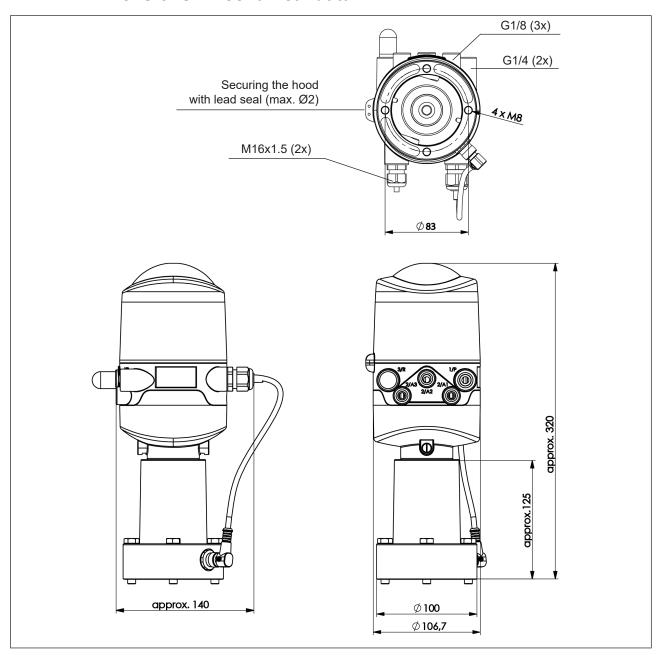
Dimensional drawing (for models with 1 or 3 pilot valves)
